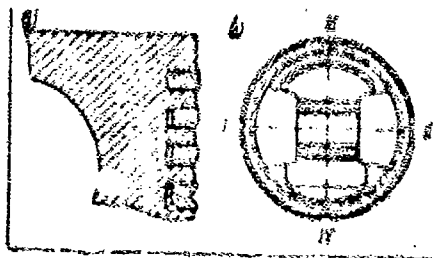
Piston ring installation on the piston a) piston ring b) ring gap placement
